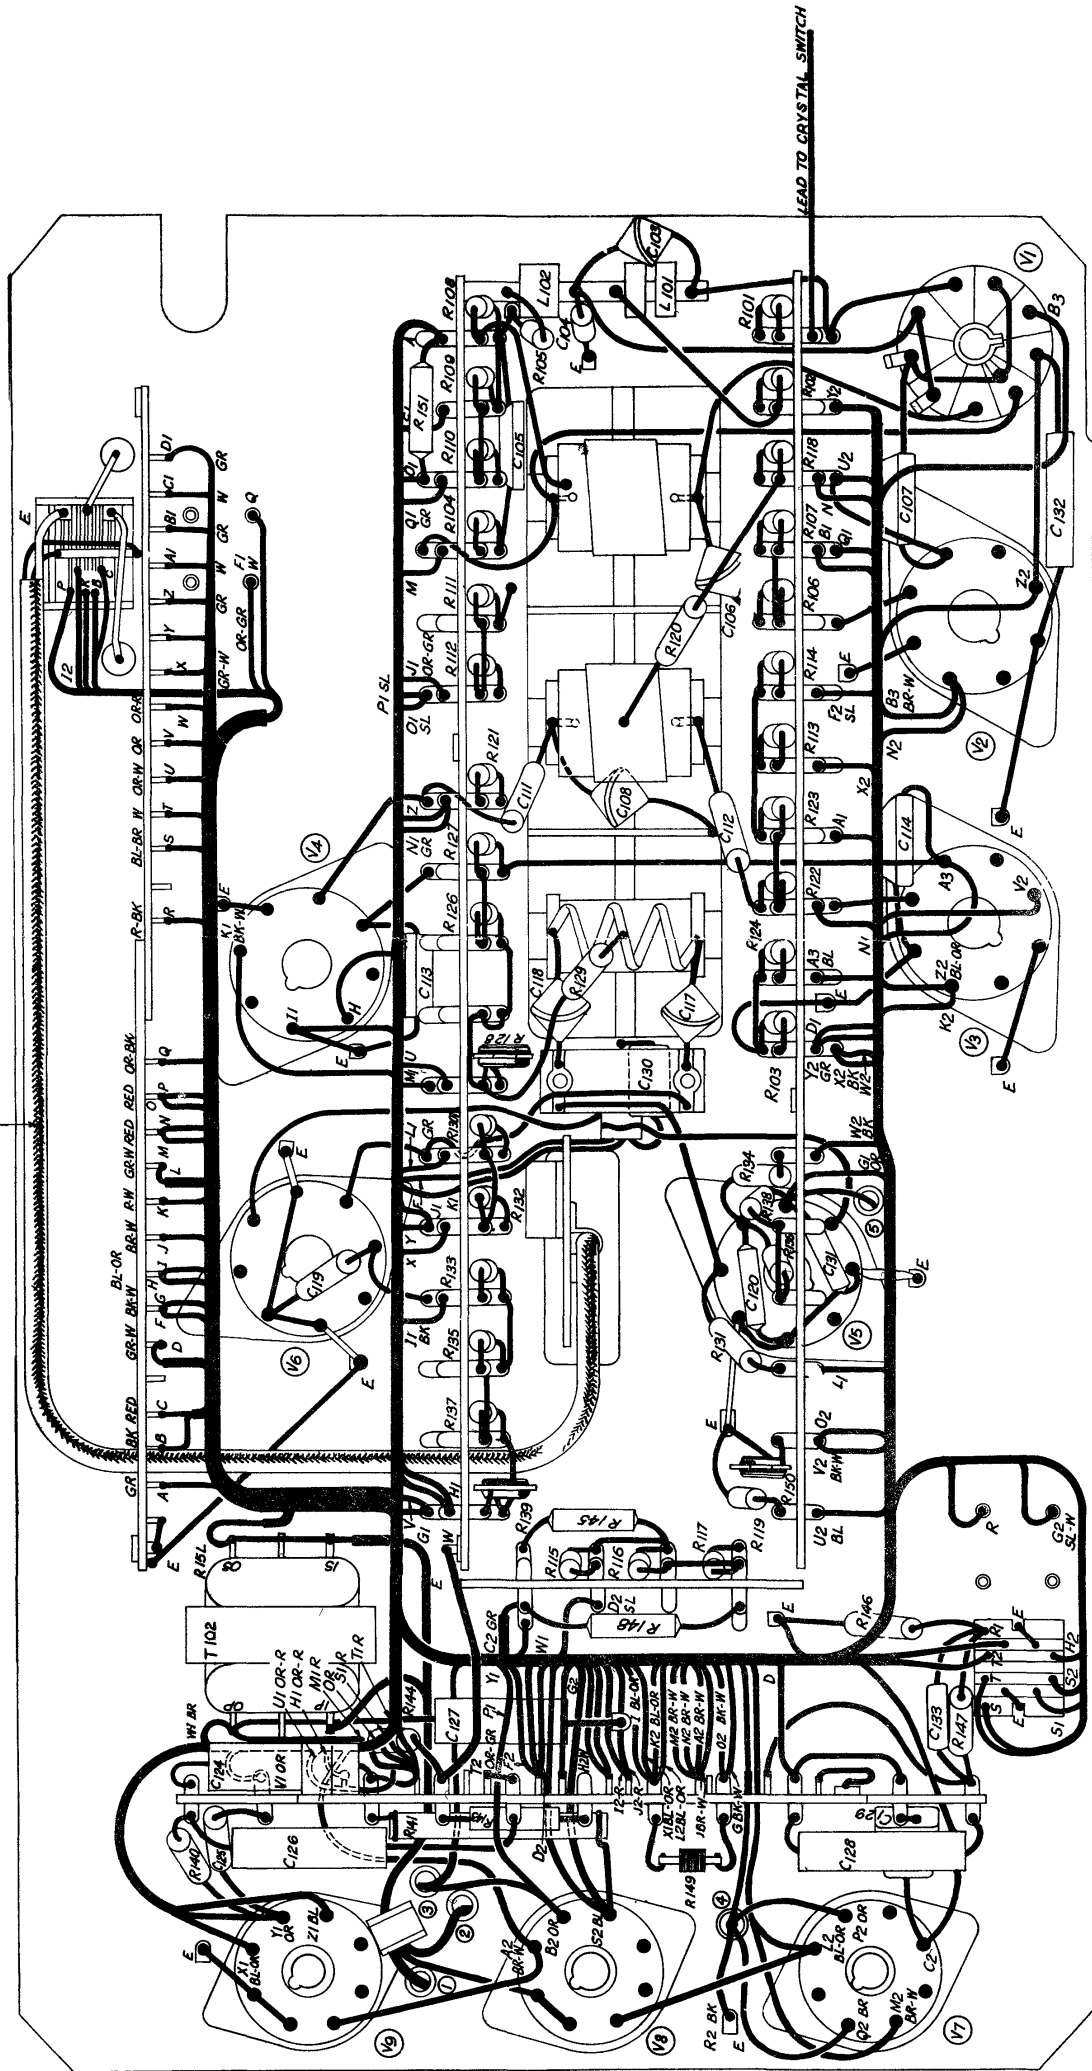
TRANSMITTER LAYOUT, UNDERSIDE VIEW
